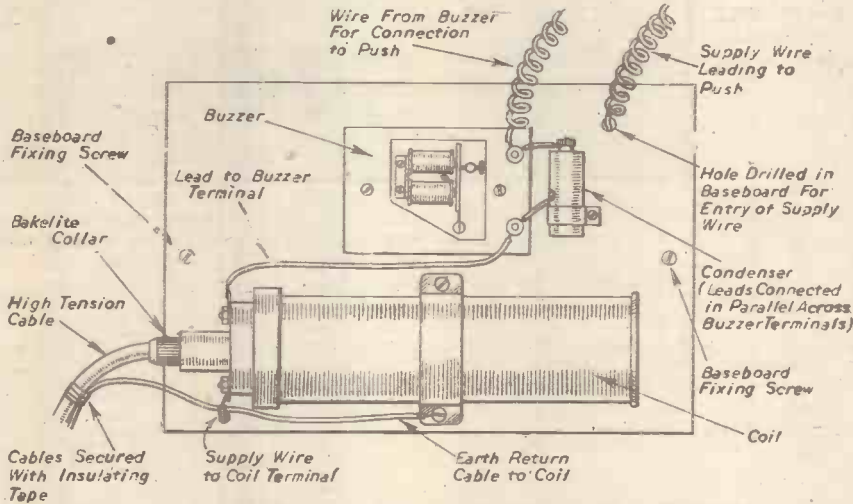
General layout and wiring of the electric gas-lighter. Cover of buzzer is removed, and the condenser is shown mounted on the baseboard for clarity.
